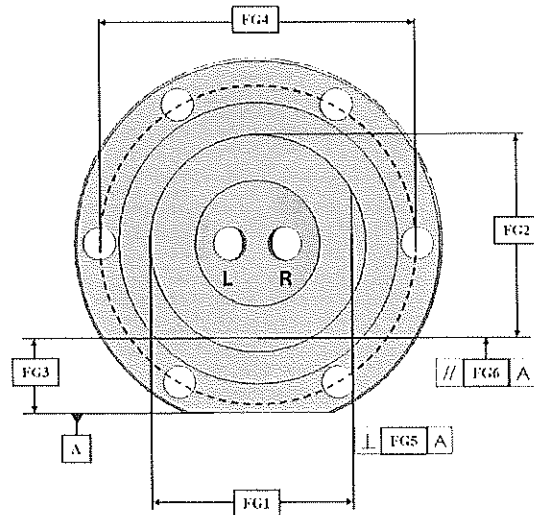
Details of dimensional inspection of the BPM Flange
